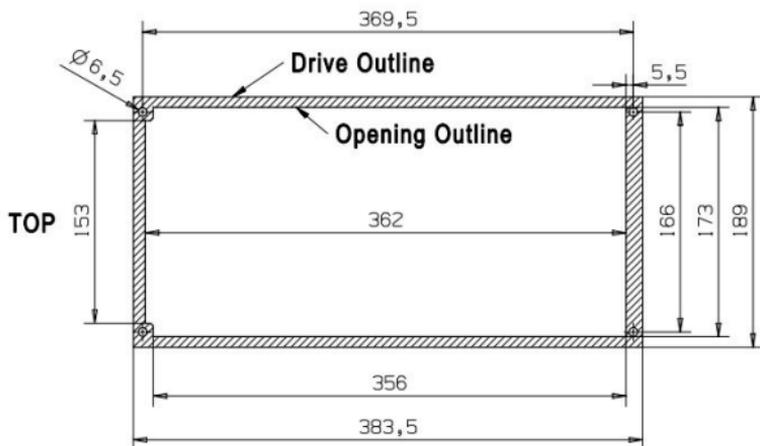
Flange mounting cutout dimensions for MI4 (Unit: mm)
